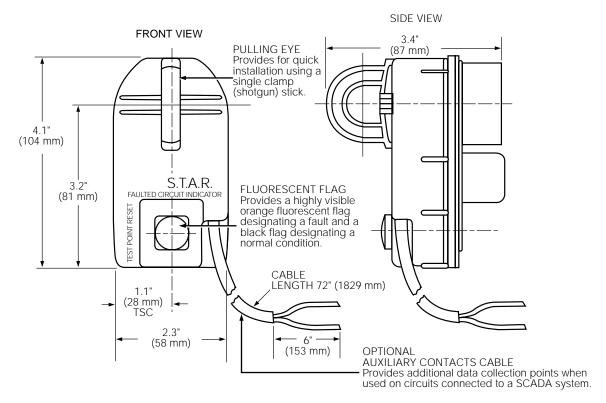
Features and dimensions of a TPR faulted circuit indicator with optional auxiliary contacts cable.
